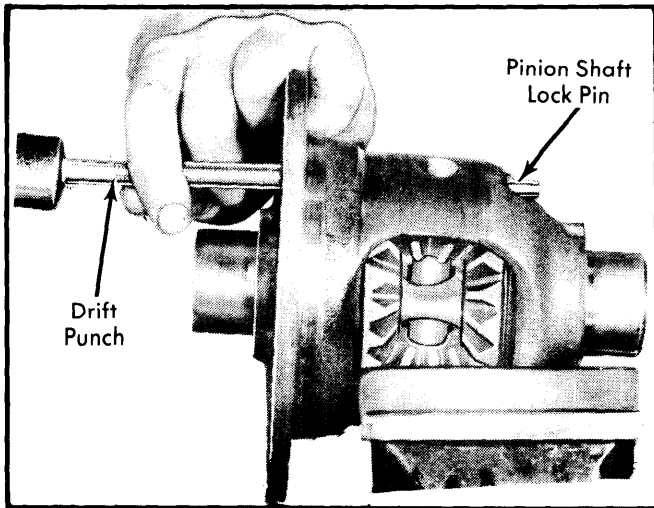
View Showing Removal Procedure for Pinion Shaft Lock Pin
